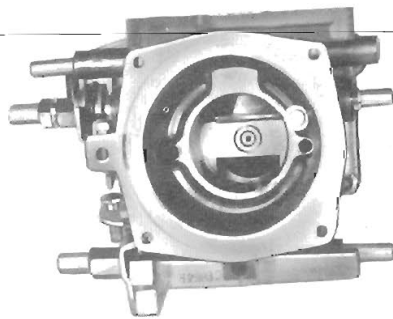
Top view of carburetor with cover and air valve assembly removed
